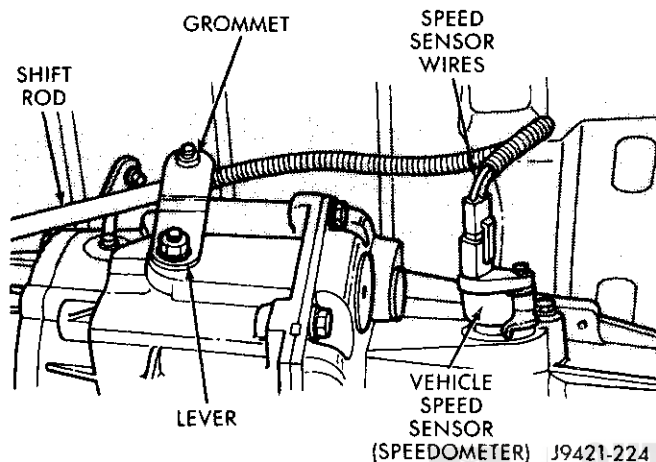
Shift Rod And Speed Sensor Wire Attachment
